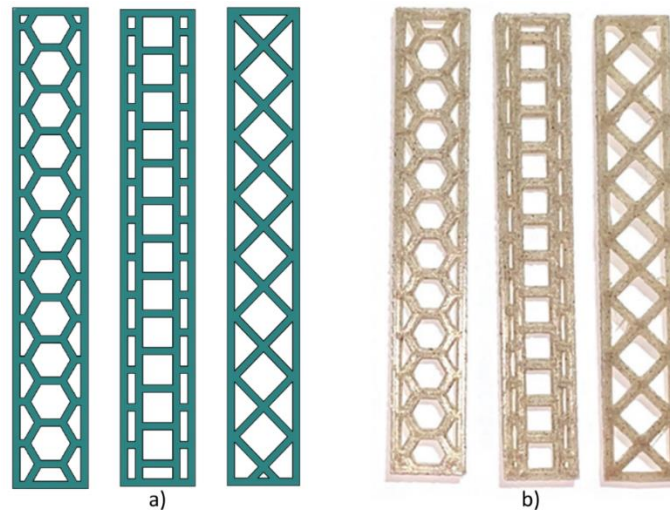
Types of sandwich structure for flexural test (a) 3D model using SolidWorks and (b) r-WoPPC 3D printed sandwich structure samples
